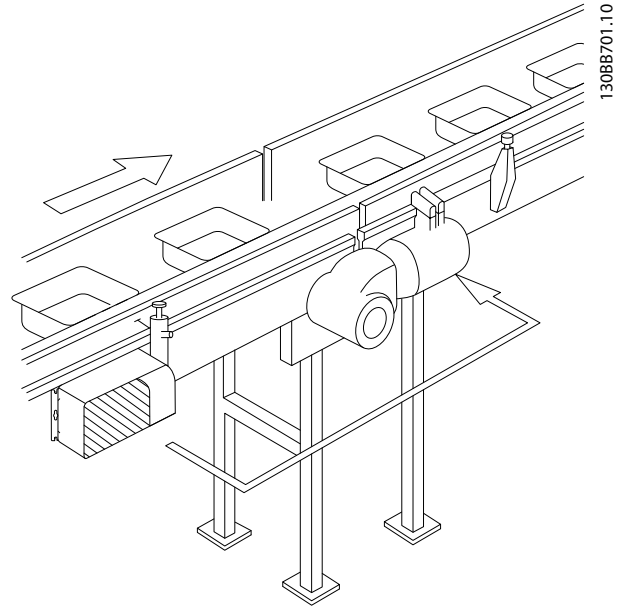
FCD 302 Stand Alone Mounted with Mounting Brackets
